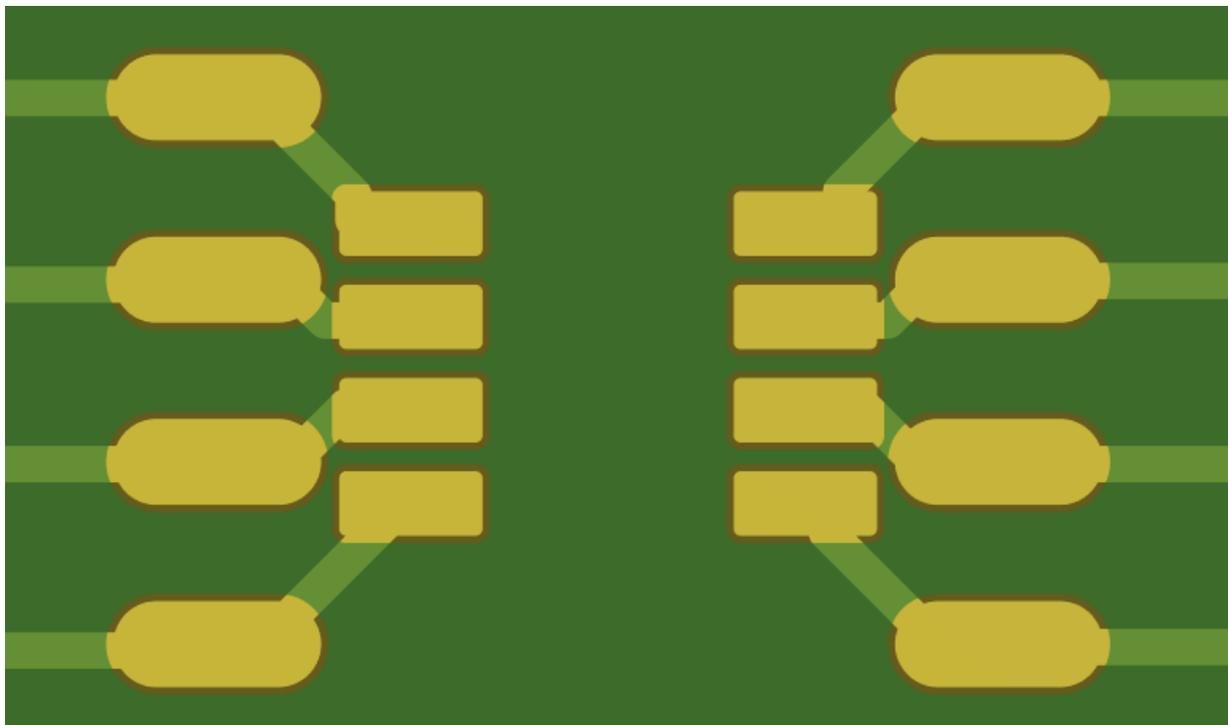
Example of a SOT-23 (DCN) Footprint Within a SOIC (D) Footprint
